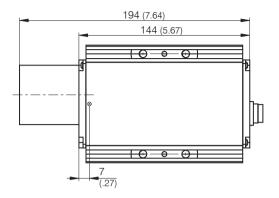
Dimensional drawing sensor, dimensions in mm, not to scale
